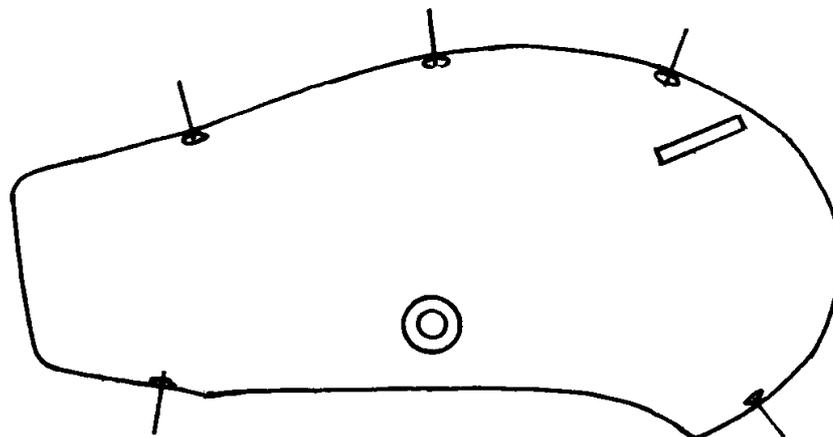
Starboard side tailwheel fairing SK7 showing bolt hole positions.
